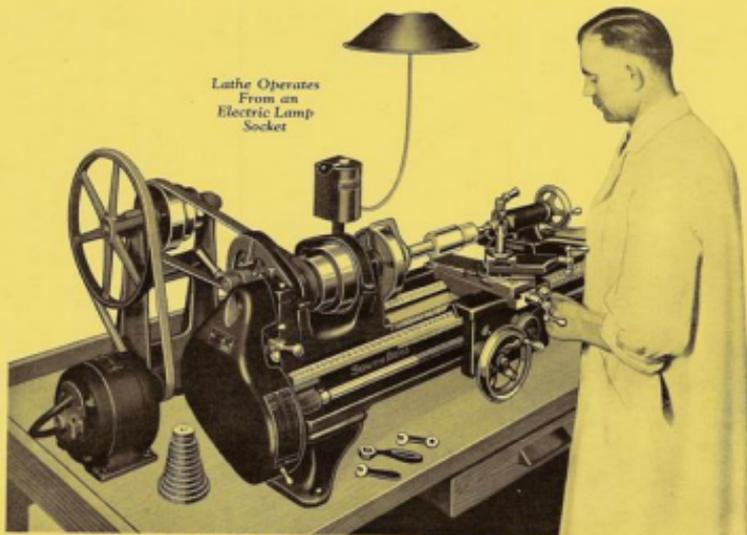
Making a Bushing in the New 5-inch Junior South Bend Lathe
